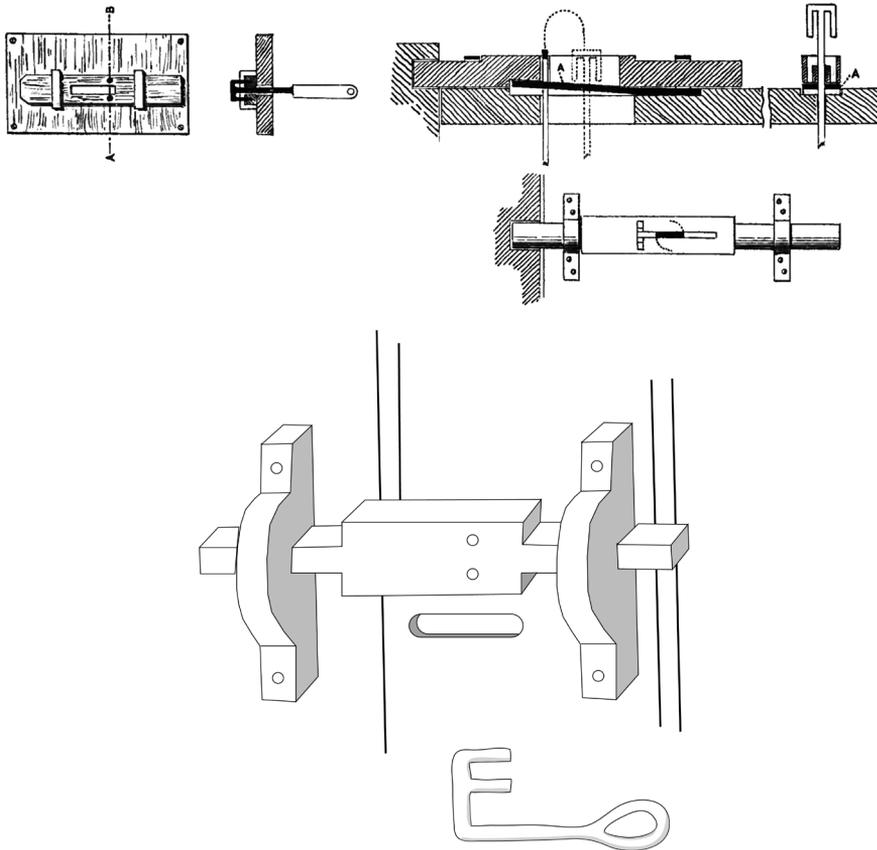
Bottom: Construction suggestion of a door lock with a sliding bolt and L-shaped lift-key (Based on Erixon 1946: figure 12). Top: Construction suggestion of a door lock with a sliding bolt and T-shaped lift-key (Detail from Pitt-Rivers 1883: Plate IV).
